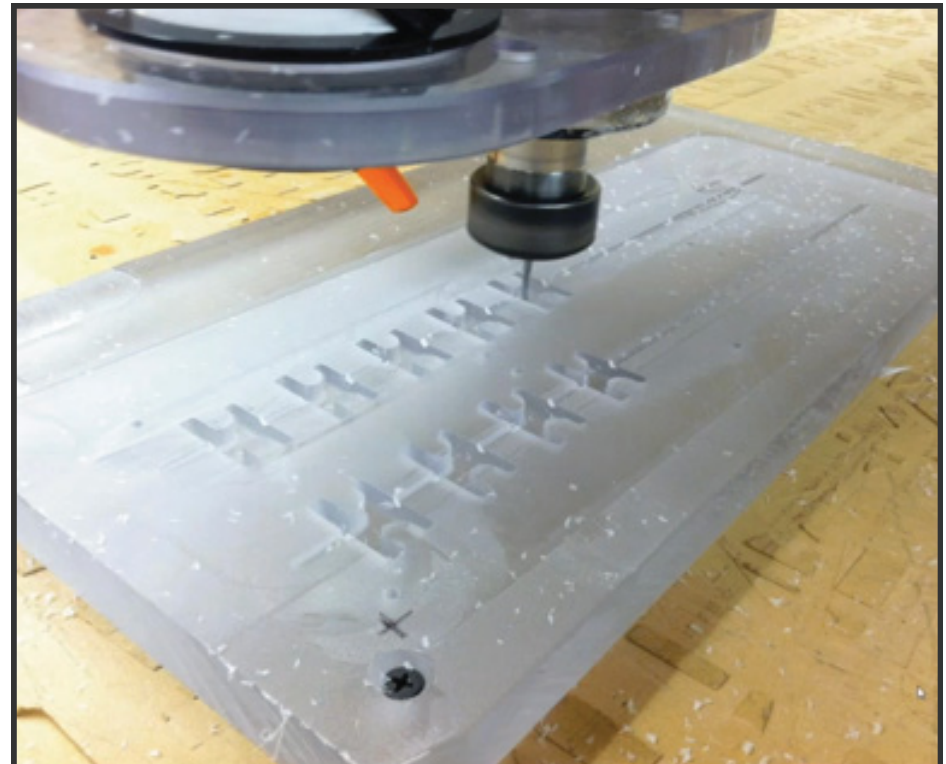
One of MSU's CAMaster® CNC machines cuts mold cavities from G-code generated from RhinoCAM® 2016 for a student design that requires molded rubber components.
